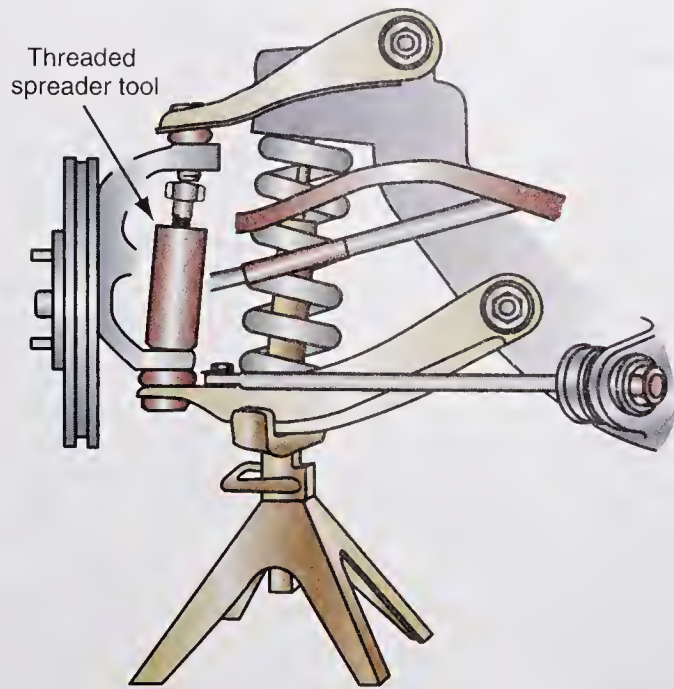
Removing the upper ball joint from the steering knuckle.
